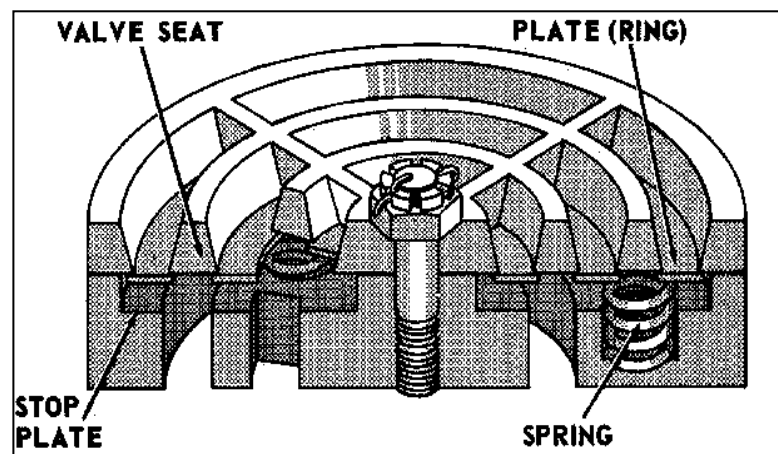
Structure of typical plate valve (Courtesy Dresser Rand Company)
